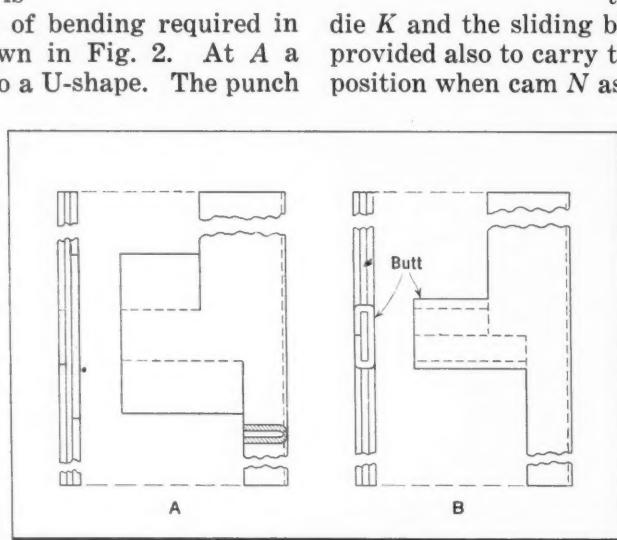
Knitting Machine Needle Having a Butt which is Formed in the Die Shown in Fig. 3
